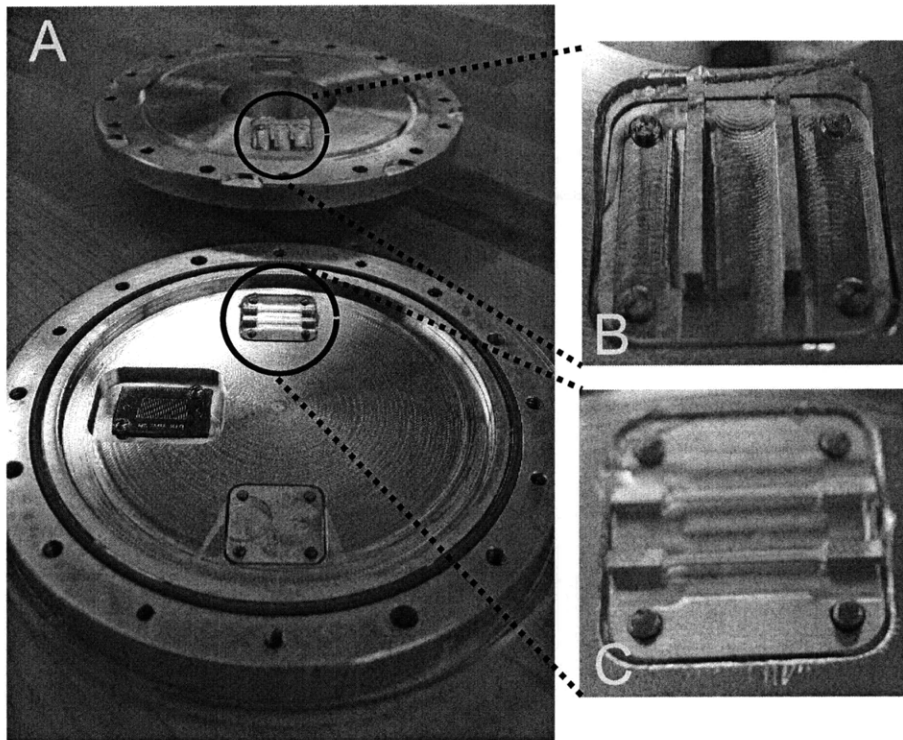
(A) Two mold halves used to mold multiple PDMS surfaces simultaneously. (B) Mold insert for control channels with some torn PDMS still attached. (C) Mold insert for flow channels.
